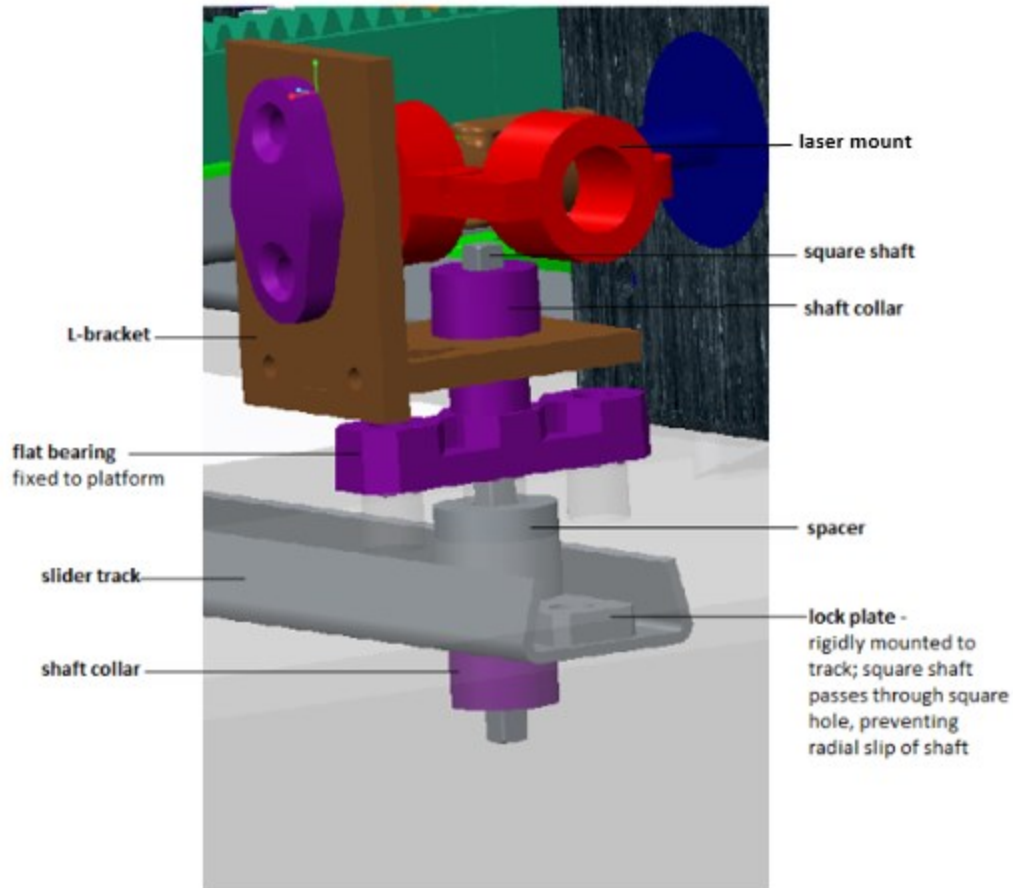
Assembly of “Eye”, represented by the laser mount, and parts along the square shaft below it
